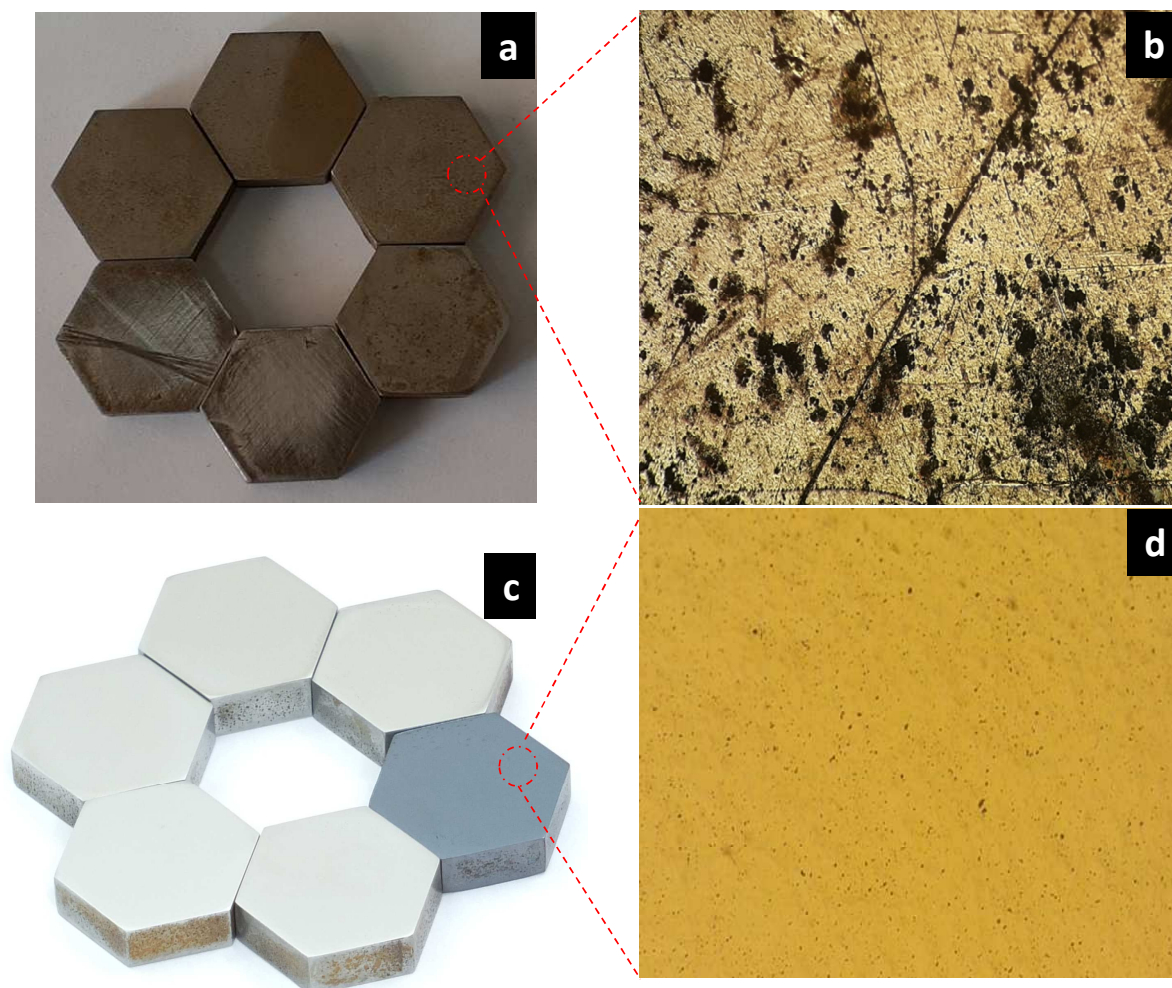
Photographs and the corresponding optical microscope top view of the Steel disks before (a) and after mechanical polishing
